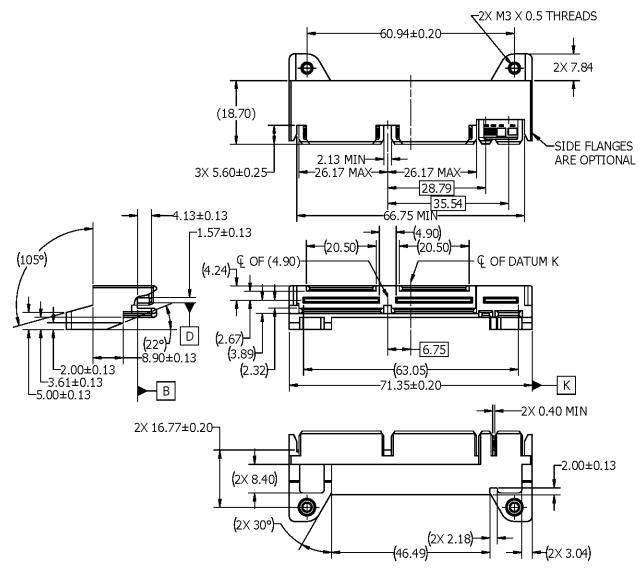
Combo x16+21A Power RSTR Panel Mount Plug
